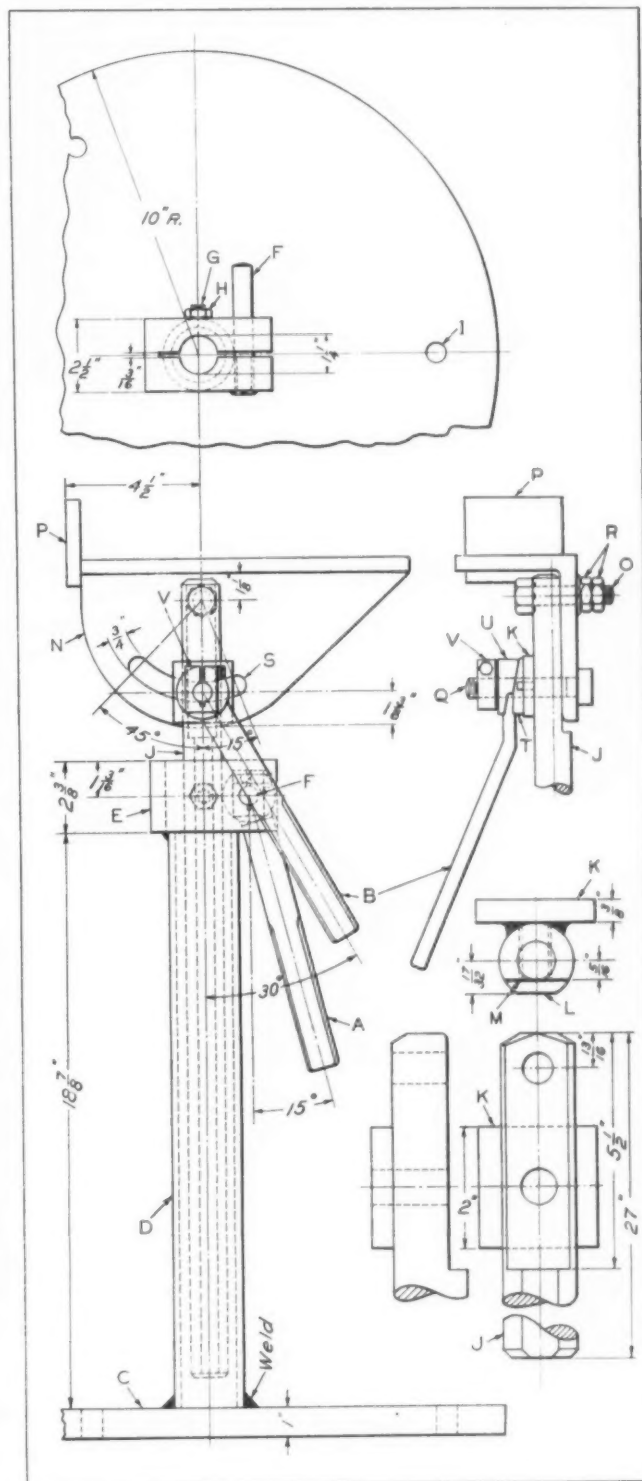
Stock Support of Design Employed on Machines Shown in Fig. 1
